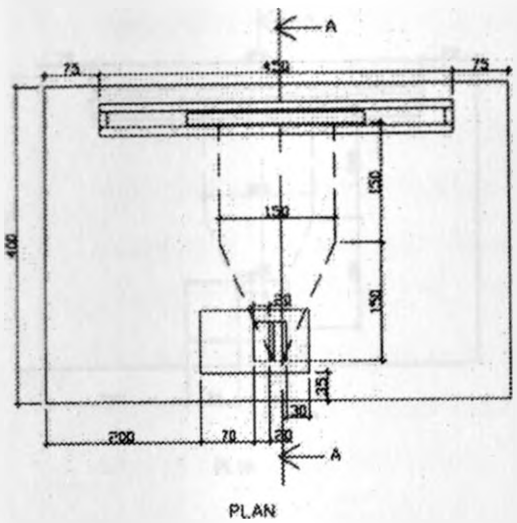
Quiescent bottom filled mould design assembly used in the current study for green sand casting. All dimensions are in mm
